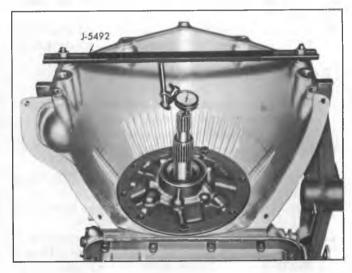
PG-Checking End Play for Proper Thrust Washer Selection
